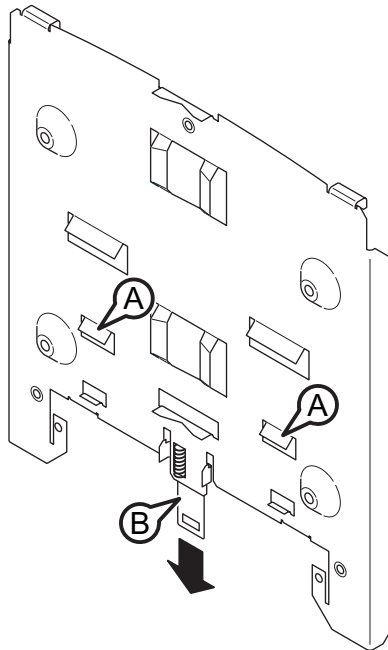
Mounting plate with fittings for DIN rail mounting
